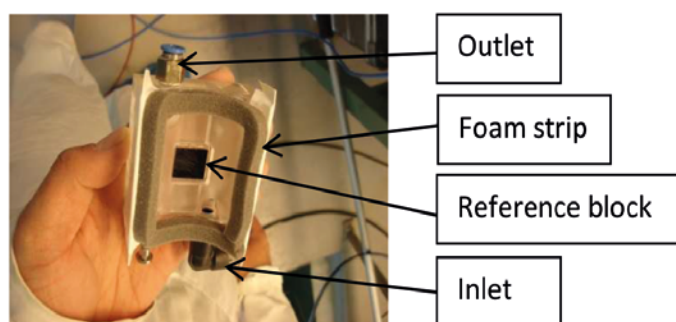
Molding frame designed by WesDyne to perform remote RMT on control rod extensions.
